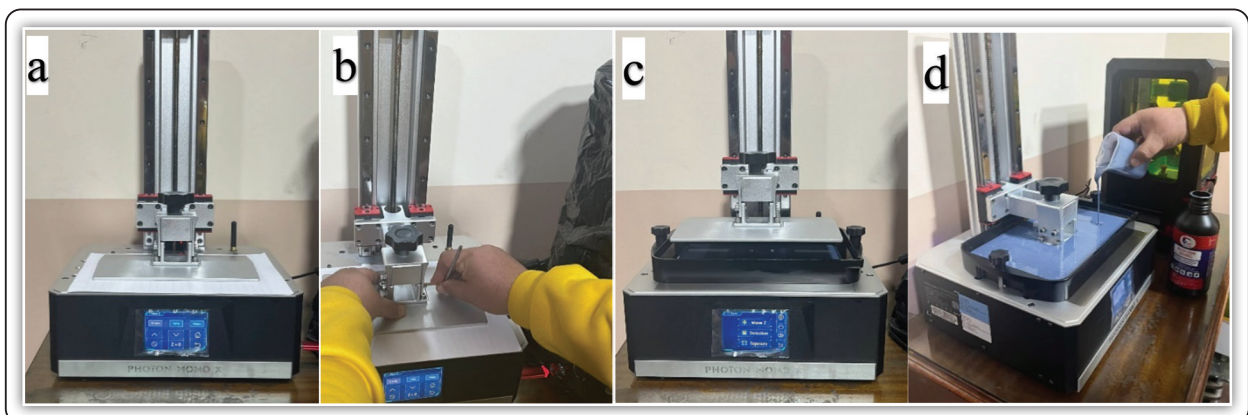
a) leveling of the 3D printer forming plate, b) screw tightening, c) resin tank was returned to its position. d) resin was poured into the tank
